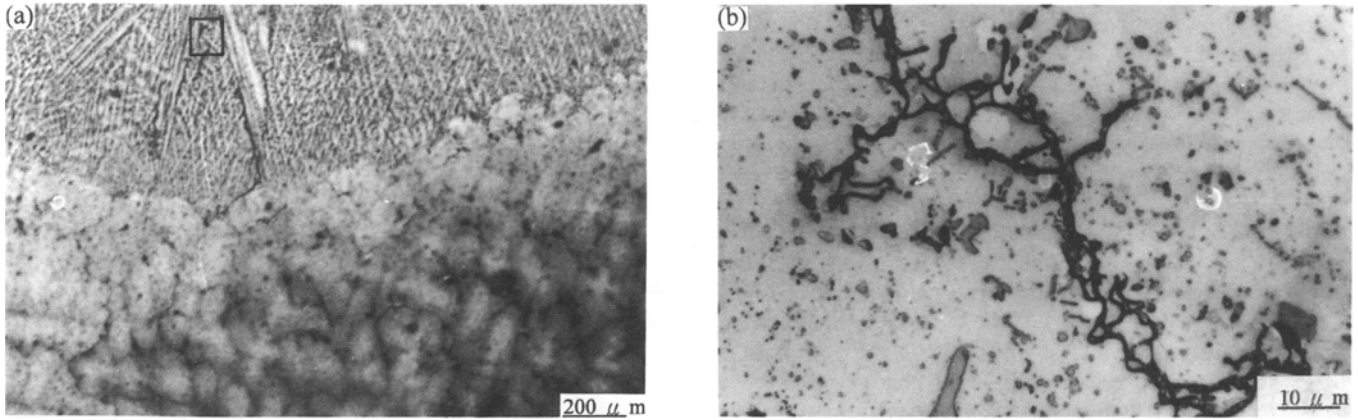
Liquation cracking of fusion zone induced from the partial melting zone, welding current: 90 A, welding speed: 240 mm/min, non-RWHT (OM)
